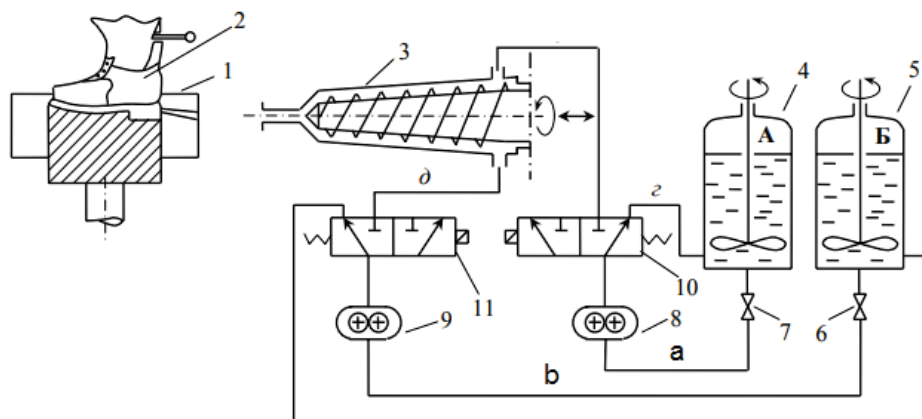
Scheme of liquid forming process of the polyurethane bottom on the workpiece of the top of the shoes: 1 – block of molding form; 2 – work piece of shoe top; 3 – mixer; 4, 5 – tanks; 6, 7 – valves; 8, 9 – dosing pumps; 10, 11 – distributors [54]
